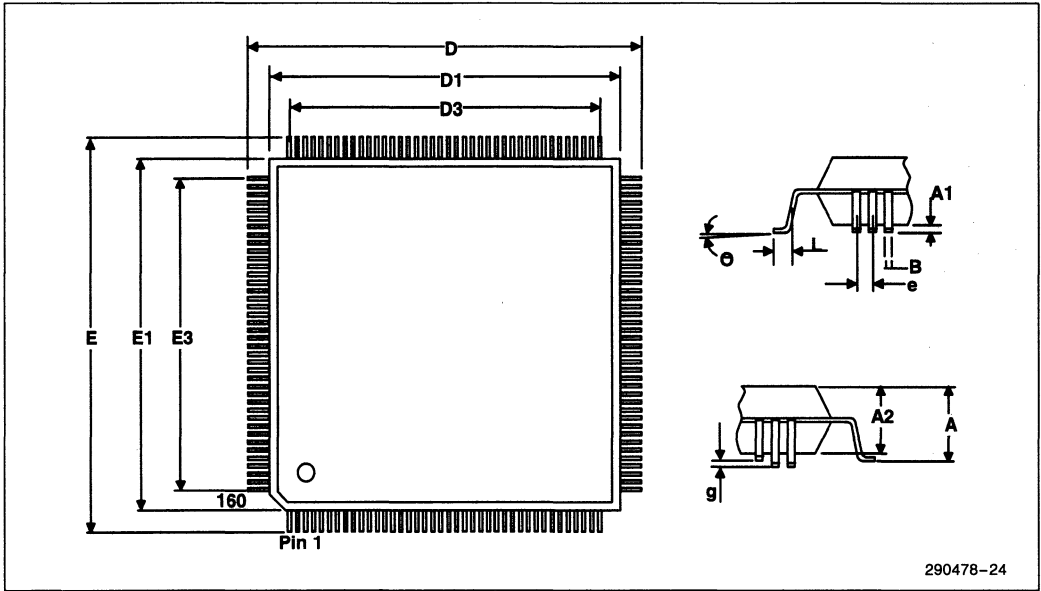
82433LX and 82433NX 160-Pin QFP Package
